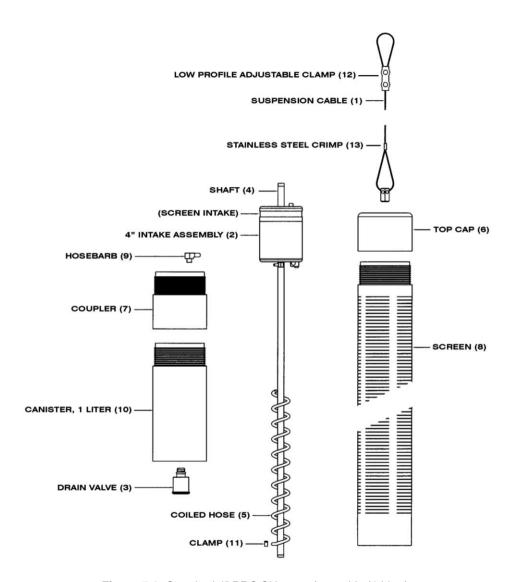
Standard 4" PRC Skimmer Assembly (1 Liter)
